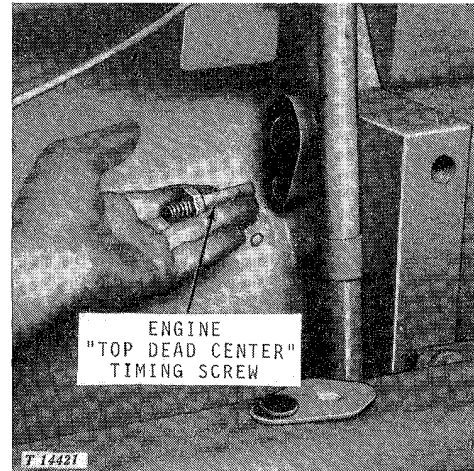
Setting No. 1 Cylinder at Top Dead Center
